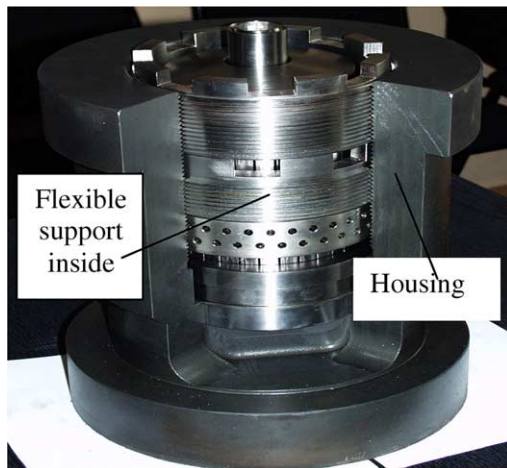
Cycle load testing of blanket flexible support and housing (RFPT).
